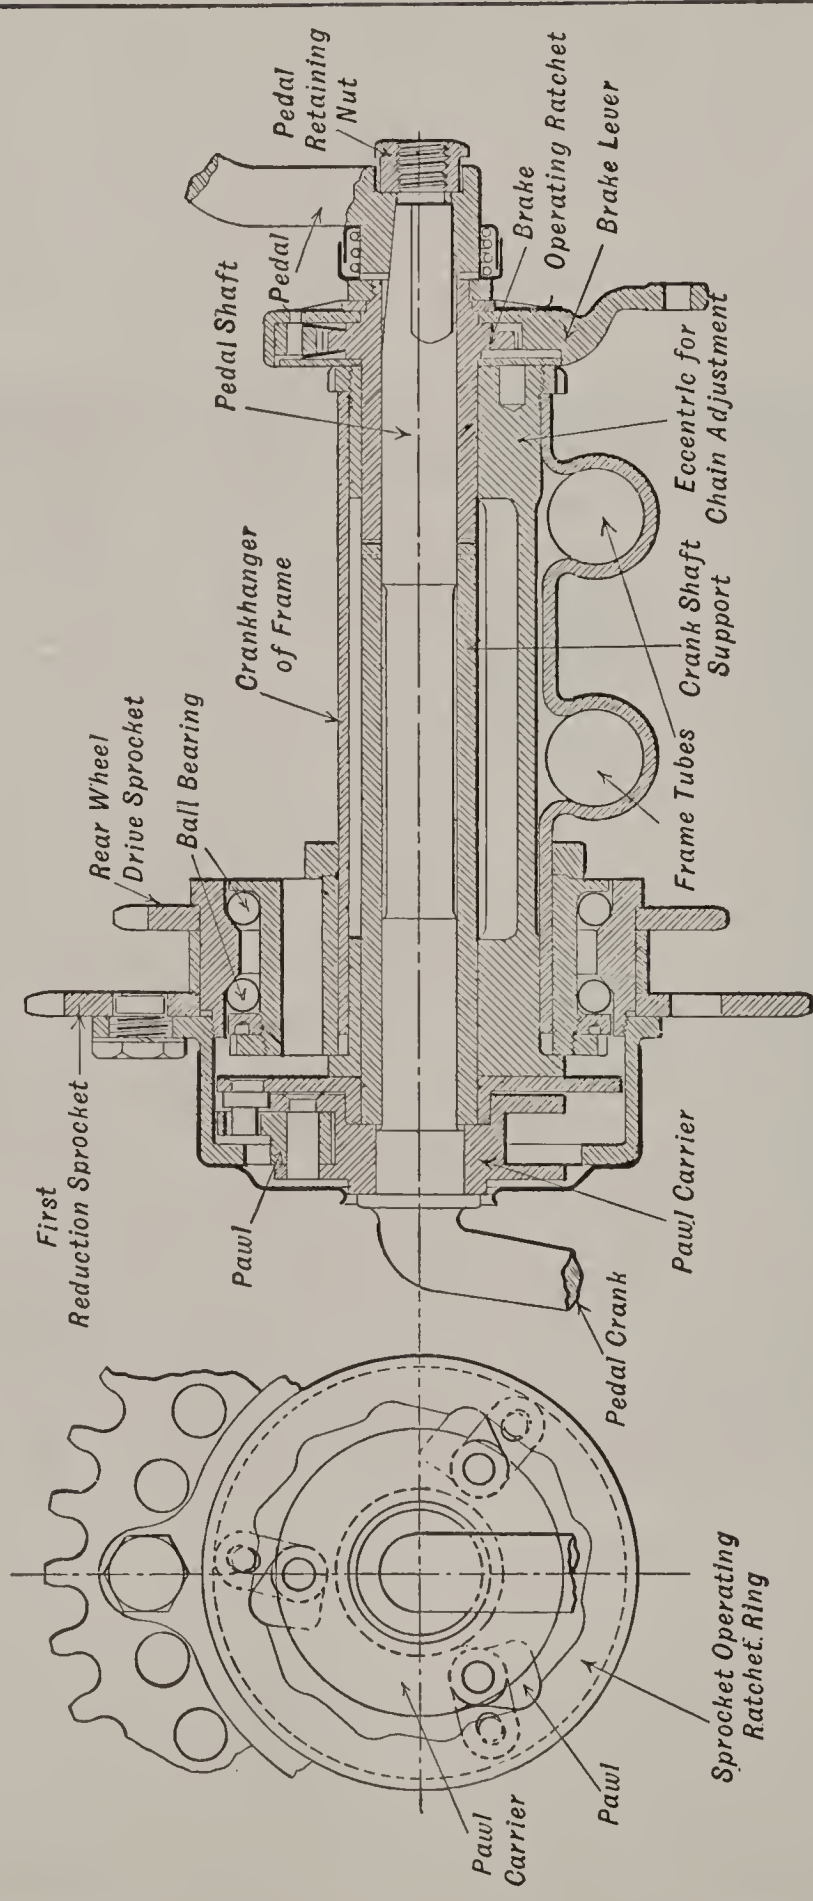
Sectional View Showing Construction of Harley-Davidson Kick Starter.
